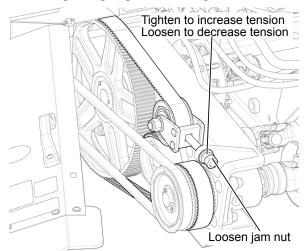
Feed Auger Drive Belt Tension Adjustment
